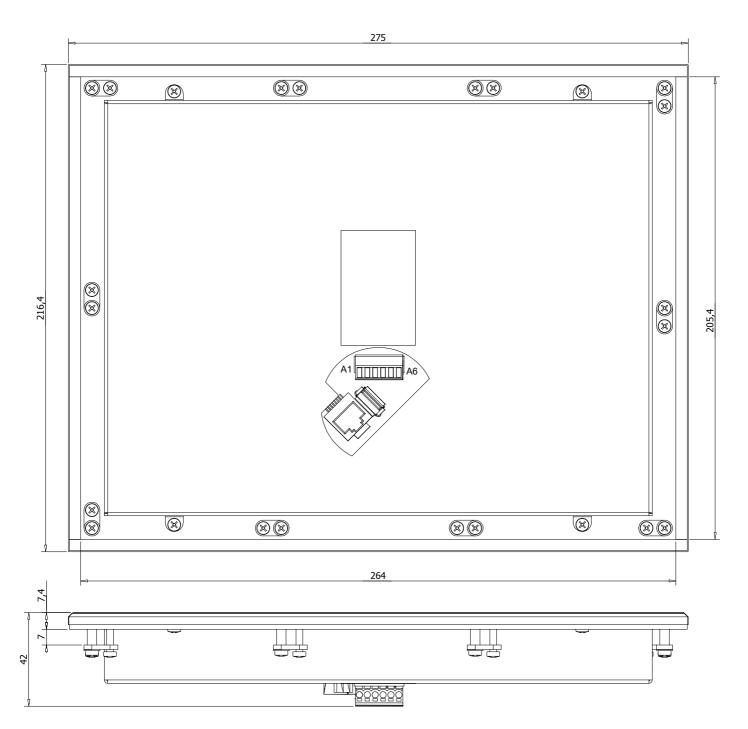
Mechanical dimensions and placement of the ID-36 module connectors
